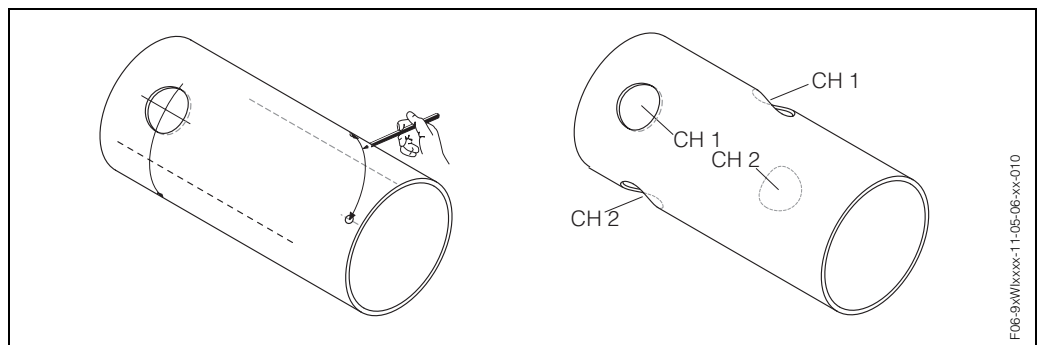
Installing the dual path measuring sensors, steps 9 and 10
